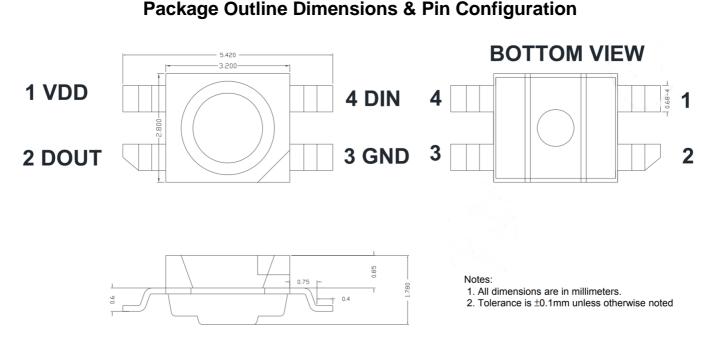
IN-PI32TATPRPGPB.GR Package Outline Dimensions
